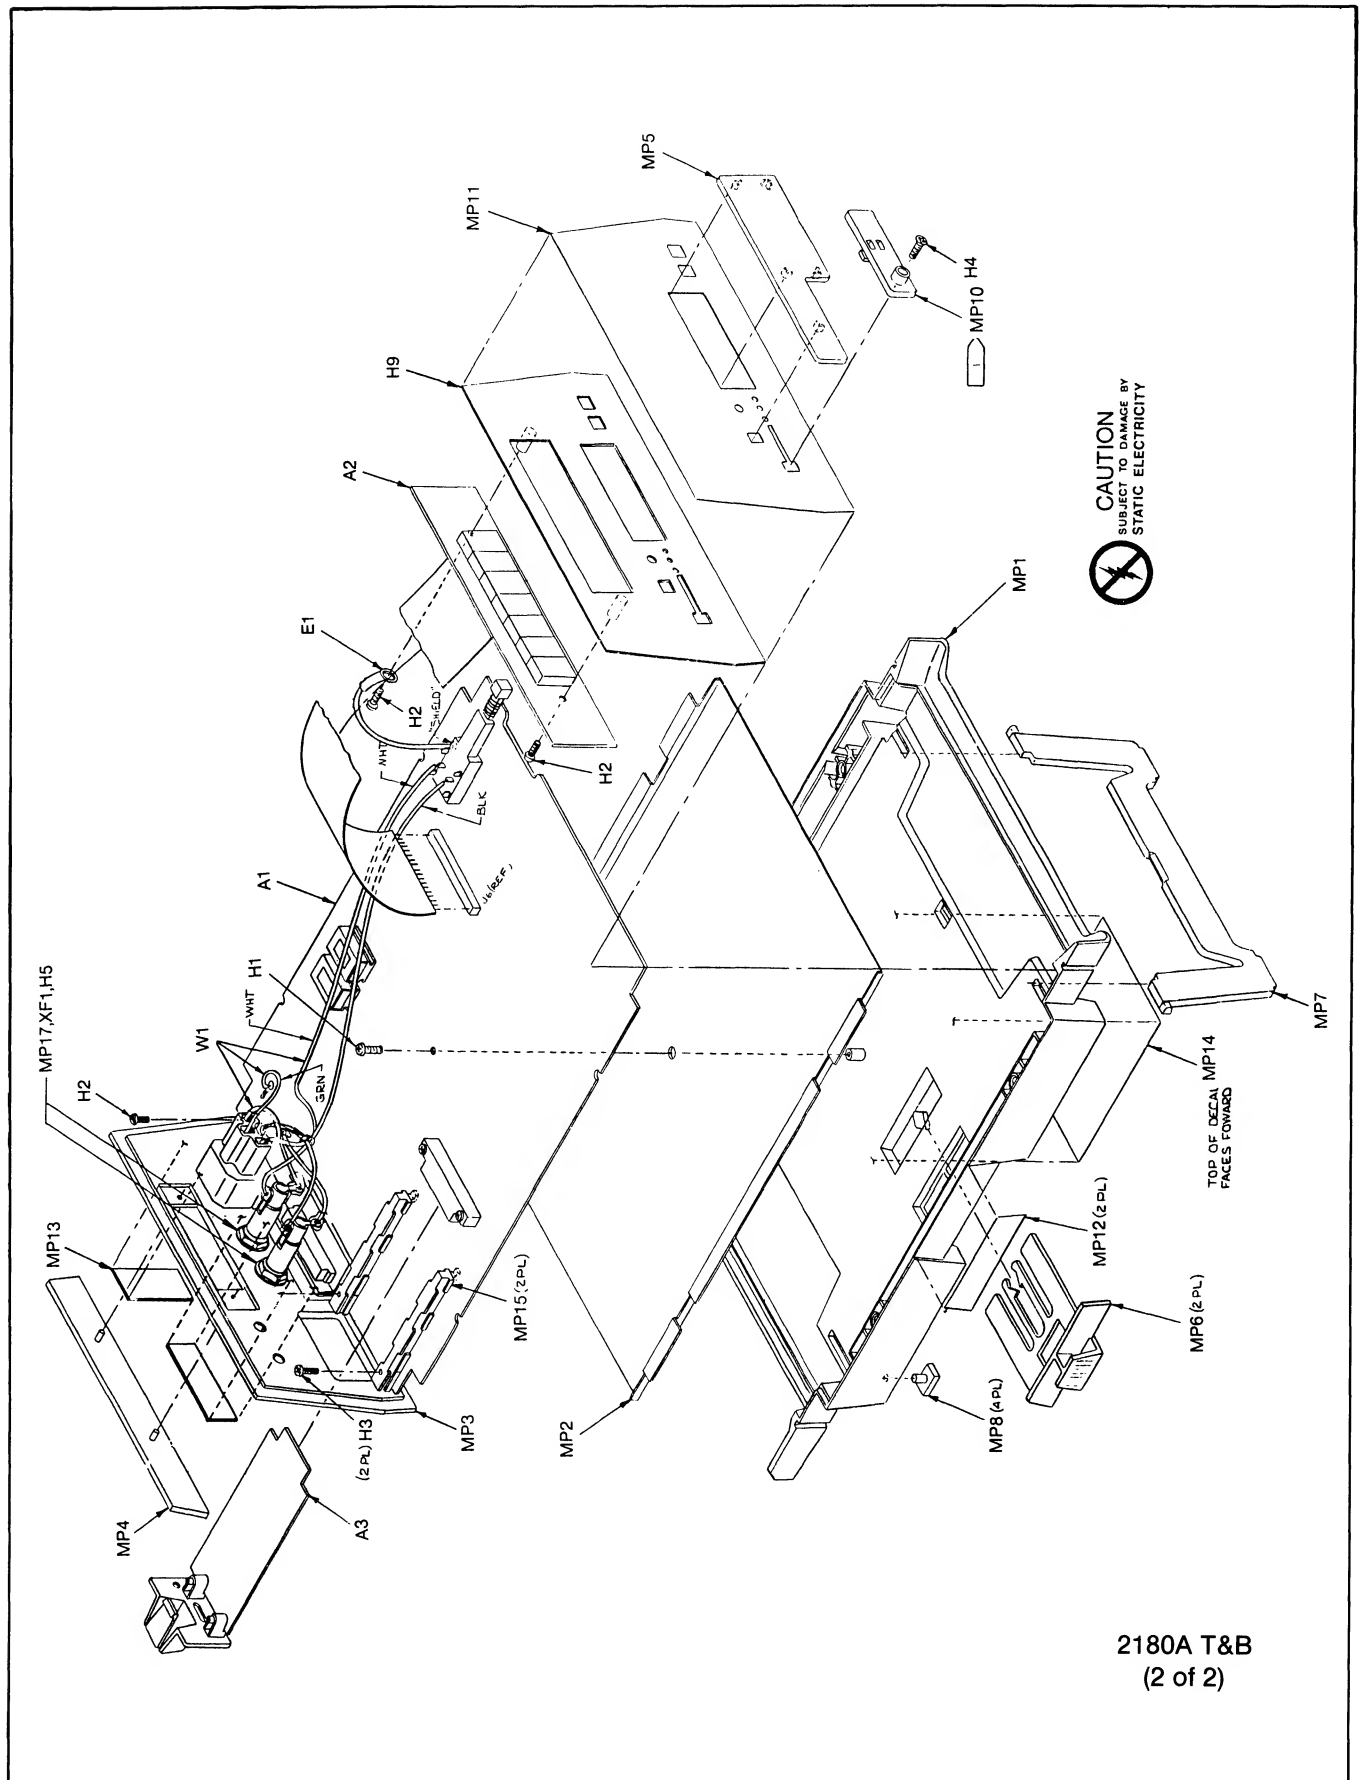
Final Assembly, 2180A Digital Thermometer (cont)
